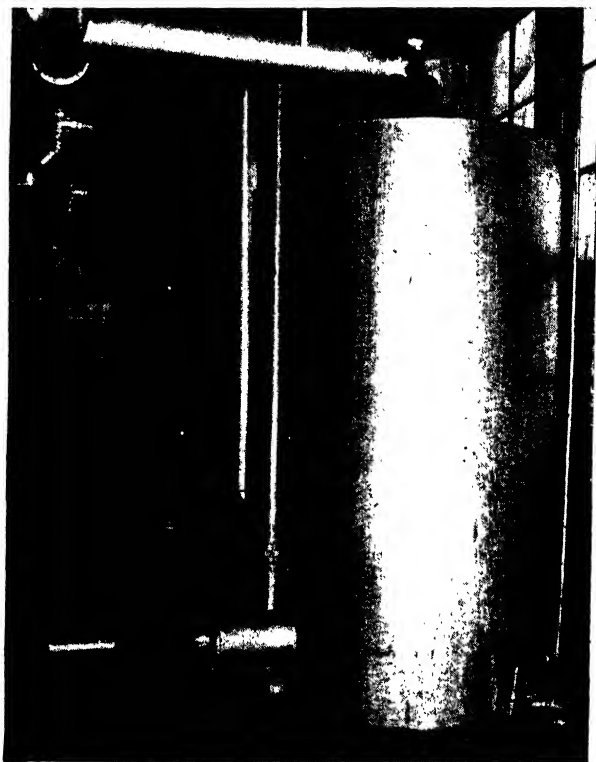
No two piping and liquid (or gas) storage and handling systems are exactly alike. A maintenance welding operator with a cutting torch, some material, an arc-welding machine, and a tank or piping problem can produce the needed system quickly and effectively. (*Courtesy of R. G. LeTourneau, Inc.*)
